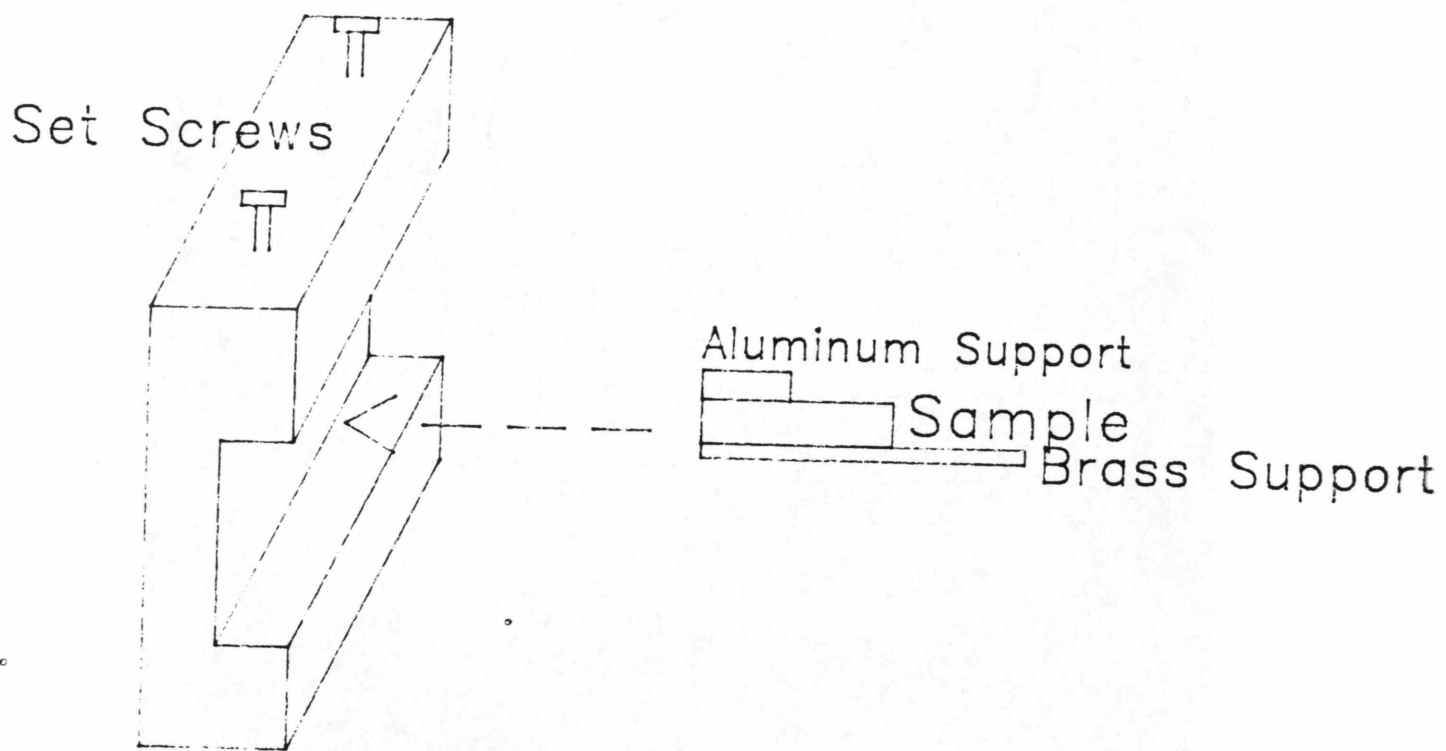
The "jig" used to hold the piece of the dogbone as a parallel outside sample is prepared on the Hardinge Milling machine.
